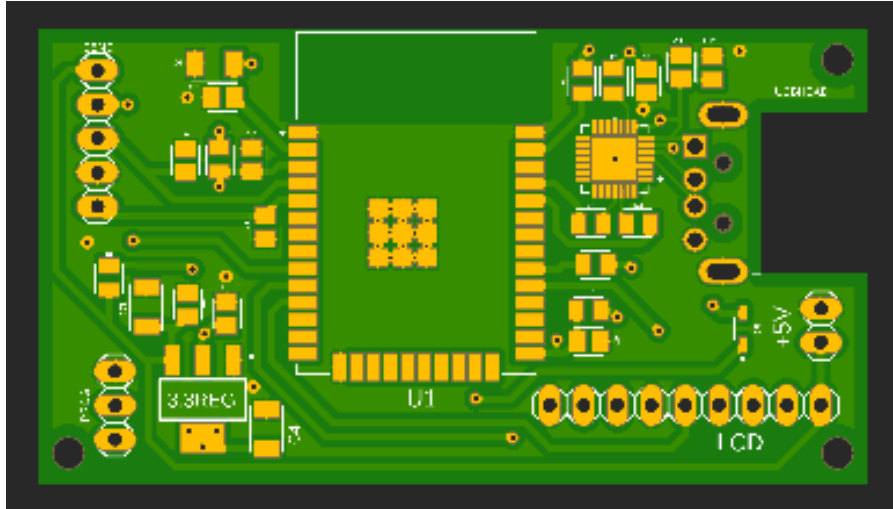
MCU PCB Manufacturing Preview by Authors
